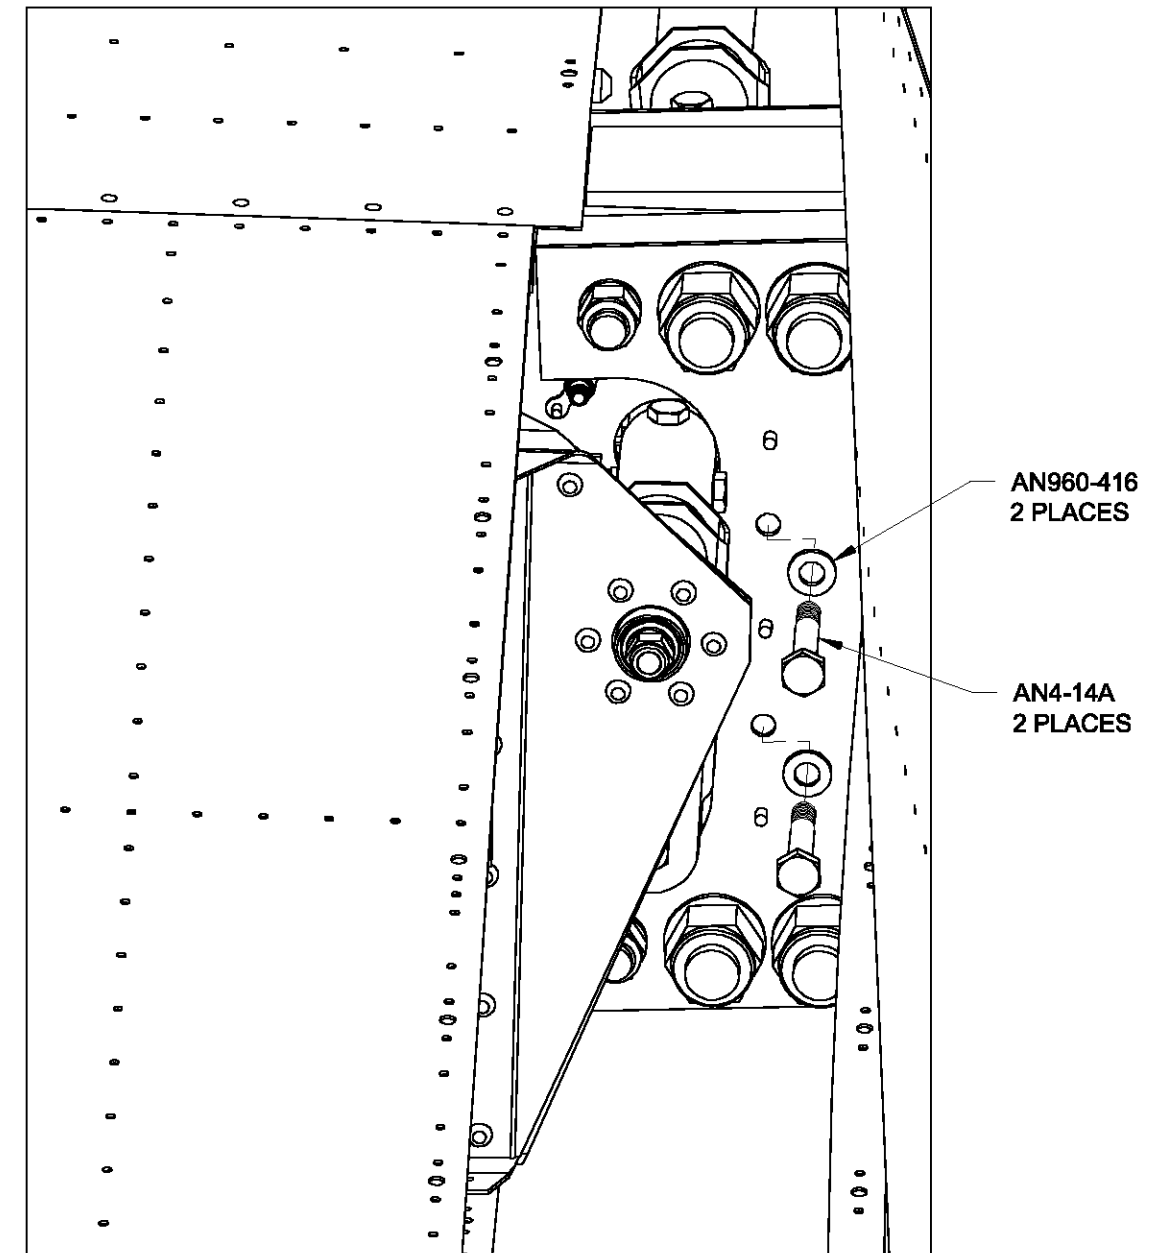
INSTALLING CENTER SECTION UPRIGHT BAR HARDWARE REAR VIEW
